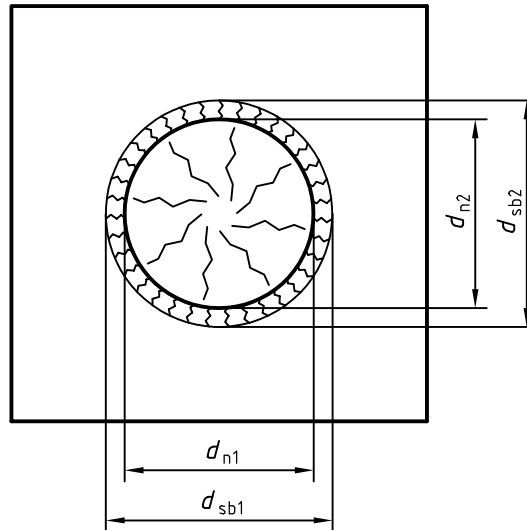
Measurement of the minimum width of a seam weld, after peel testing — Plane view
